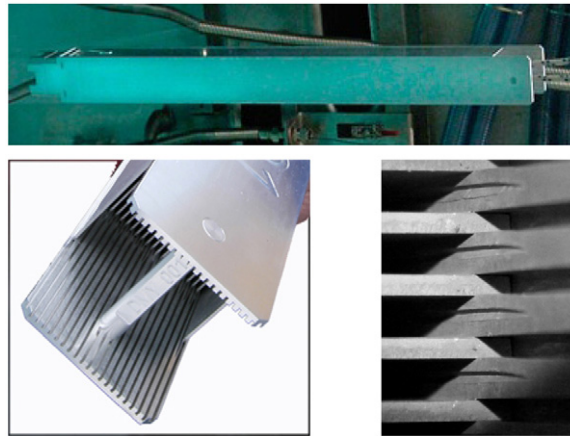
Picture of a fuel assembly with particular of the swaged plates.
